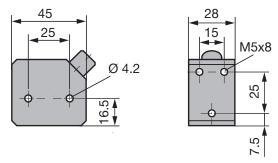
Installation dimensions of BTL5-P-4500-1 magnet
